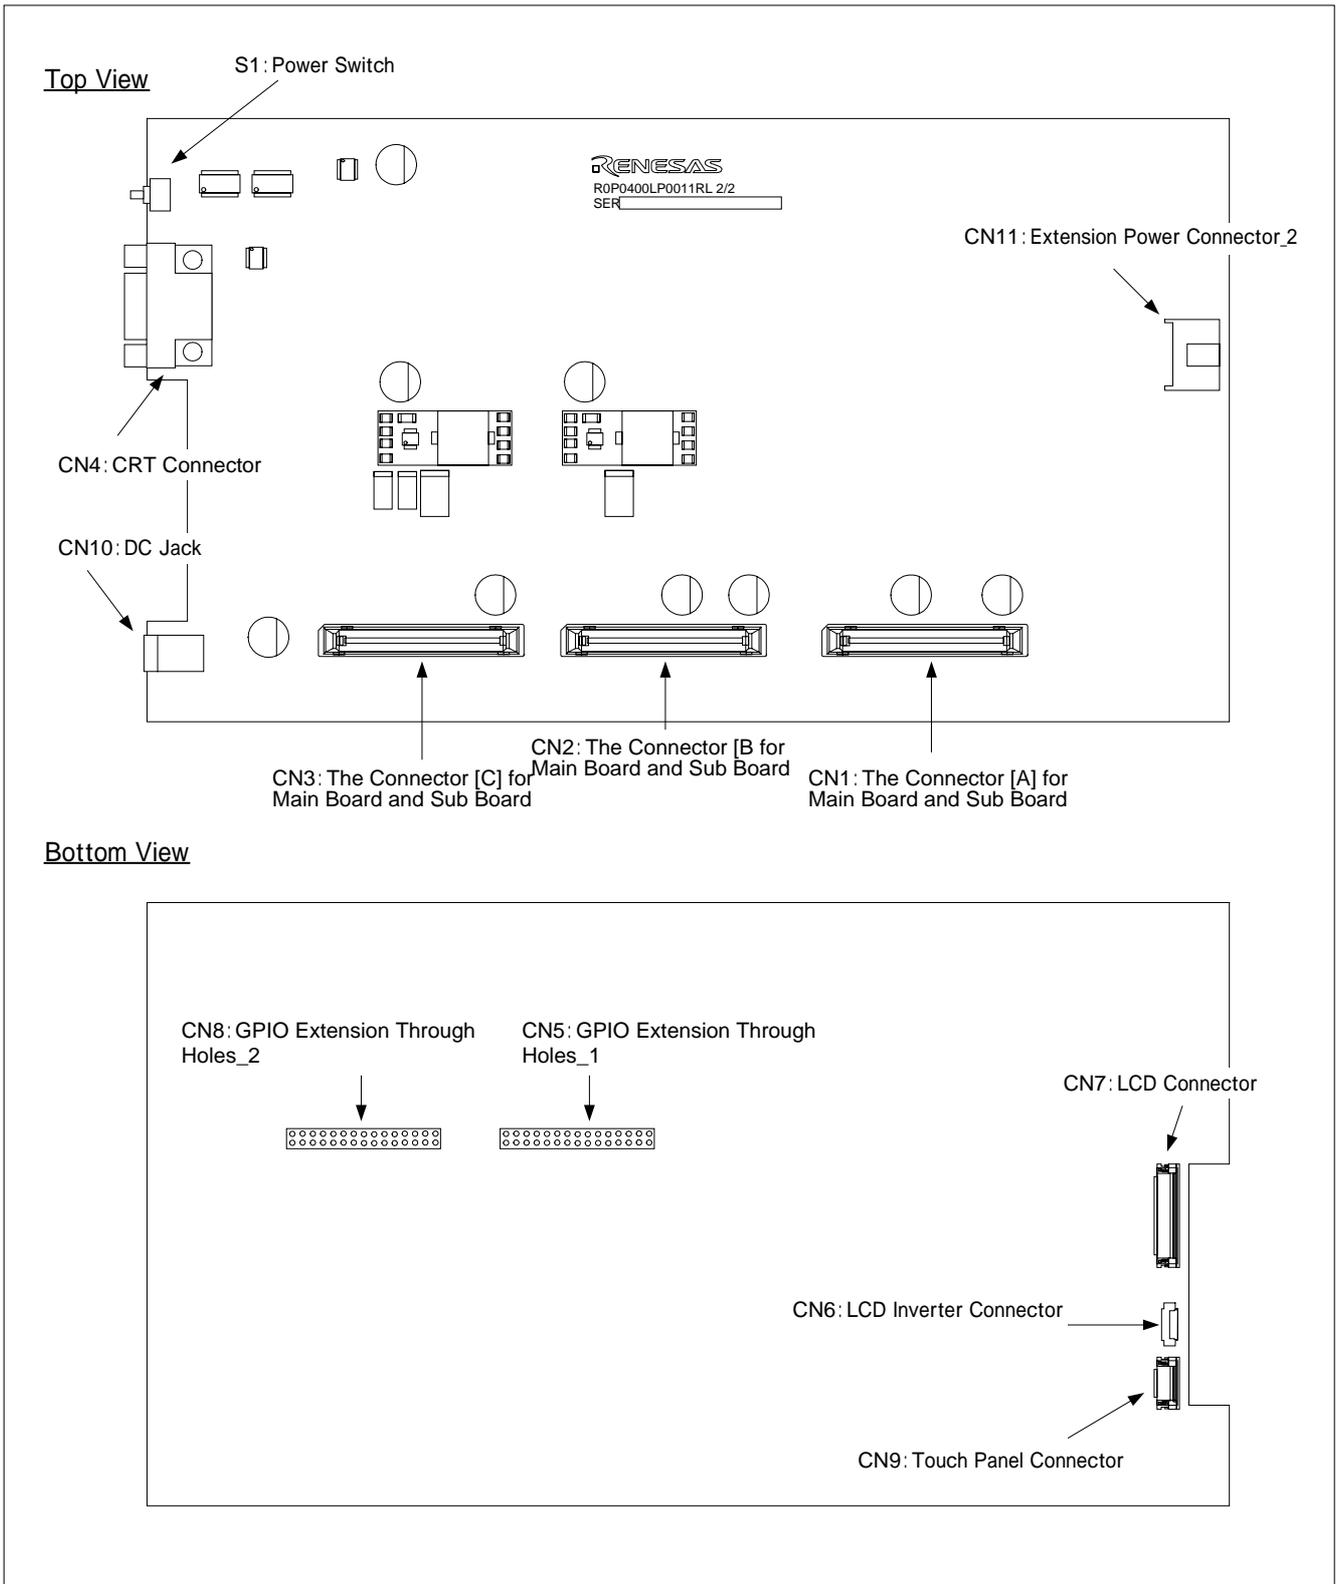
ROP0400LP0011RL Sub Board's parts reference
